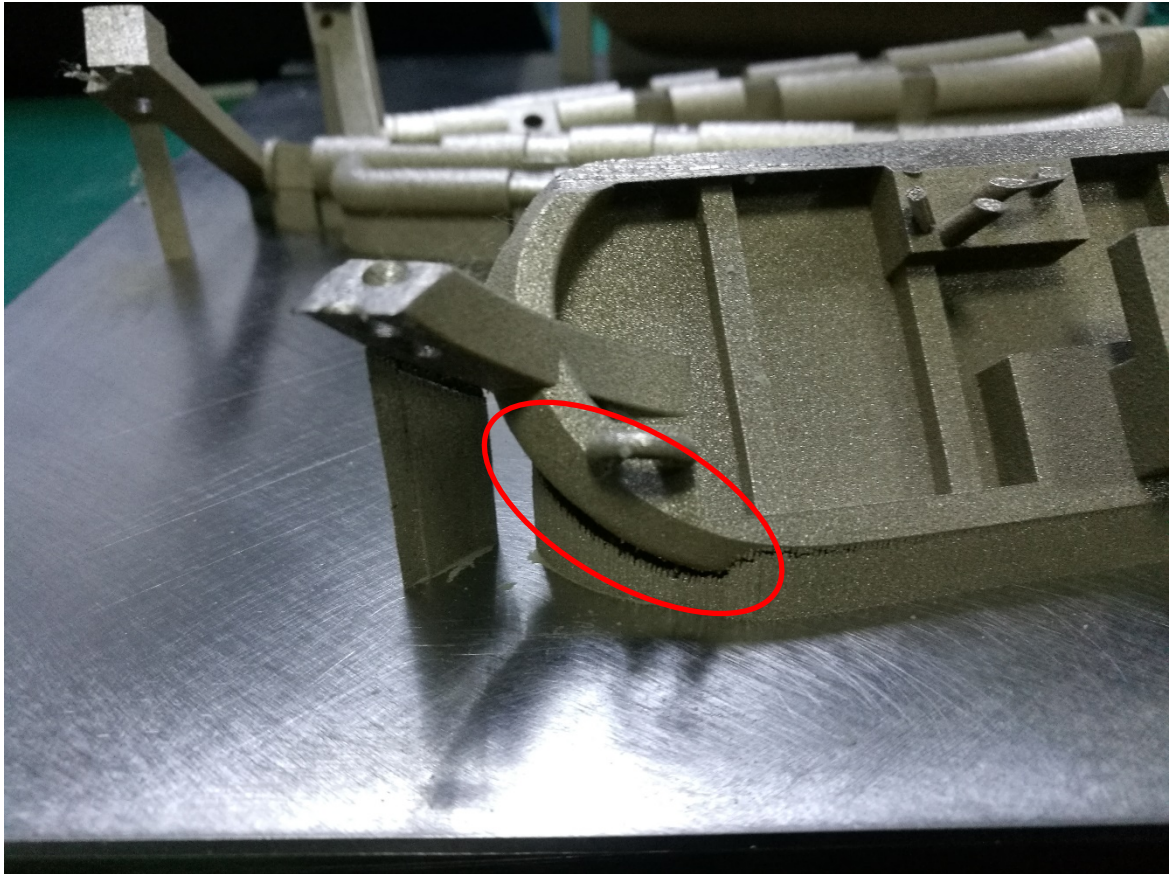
Fracture (red circle) between the part and the support during printing.
